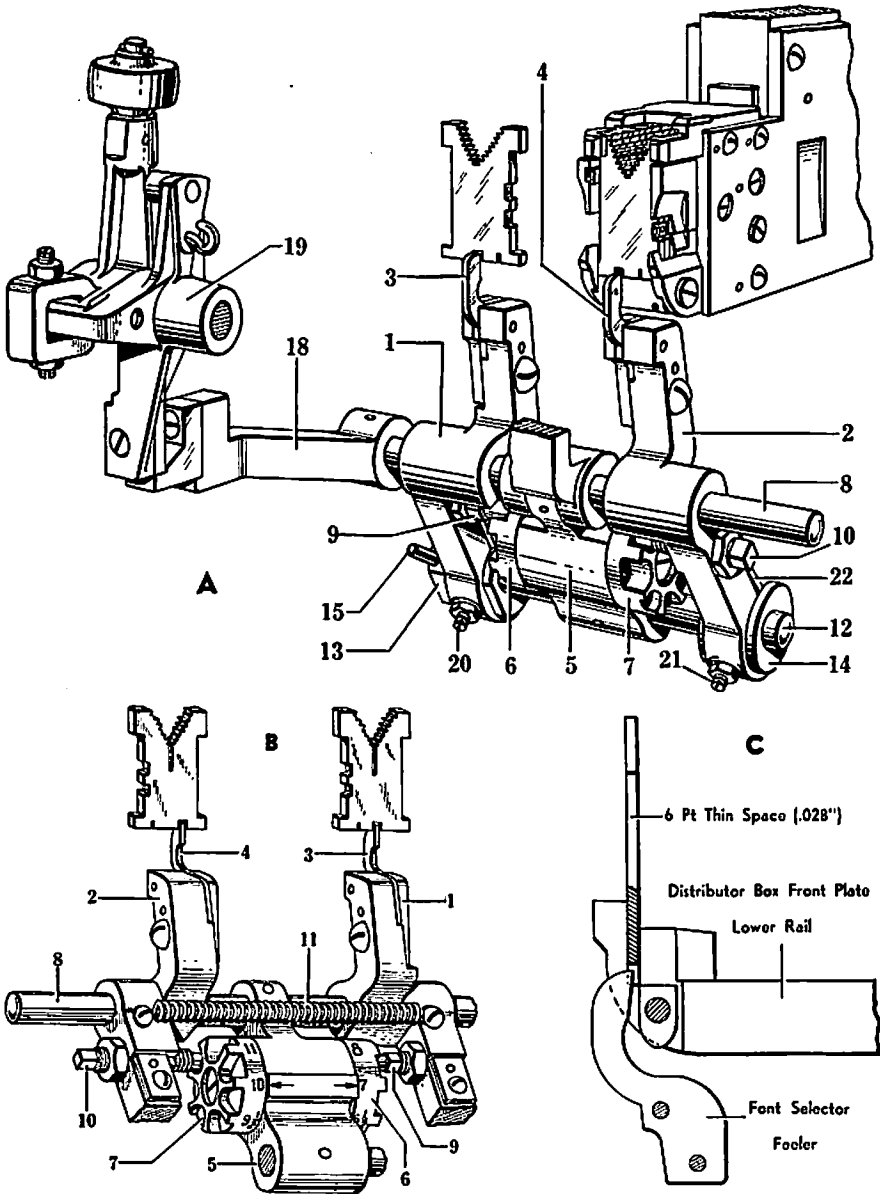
Perspective Views of the Mixer Font Selector Mechanism. Drawing A shows the font selector mechanism in relation to the distributor box and part of the distributor box clutch tripping mechanism. Drawing B indicates the relationship of the font selector feelers to the notches in the matrices and shows the means provided for changing the selector notch locations of the feelers by means of disks 6 and 7. Drawing C illustrates the position of one of the feelers with respect to the front edge of the matrix (a 6-point thin space). This position of the feeler is adjustable and determines the tripping of levers 18 and 19, as described in the text.
